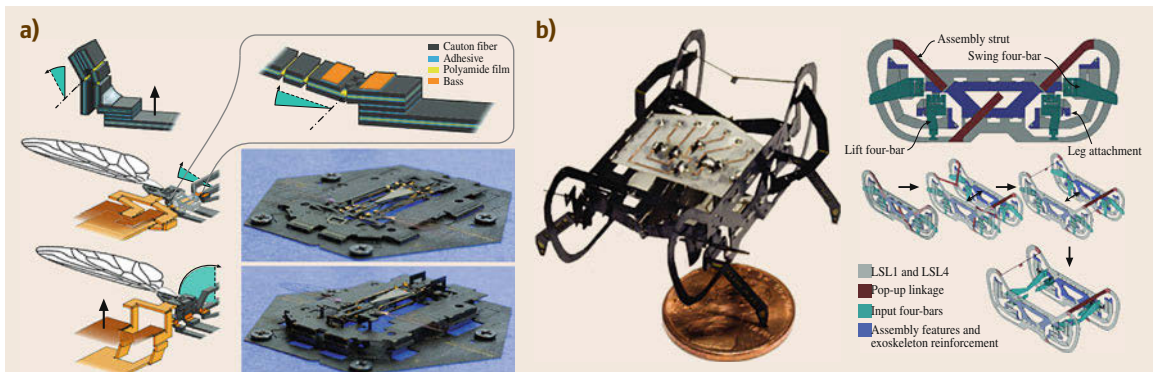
(a) Mobee, monolithic design of MFI [23.127], (b) HAMR-VP, a 1.27 g quadrupedal microrobot manufactured using the PC-MEMS and pop-up assembly techniques (after [23.16])
